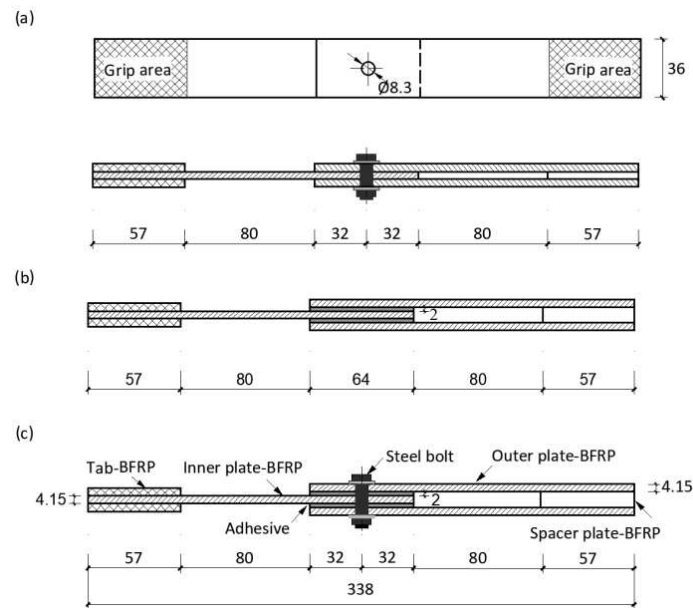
Joint dimensions: (a) bolted joint; (b) bonded joint; (c) hybrid joint (dimensions in (mm)).
